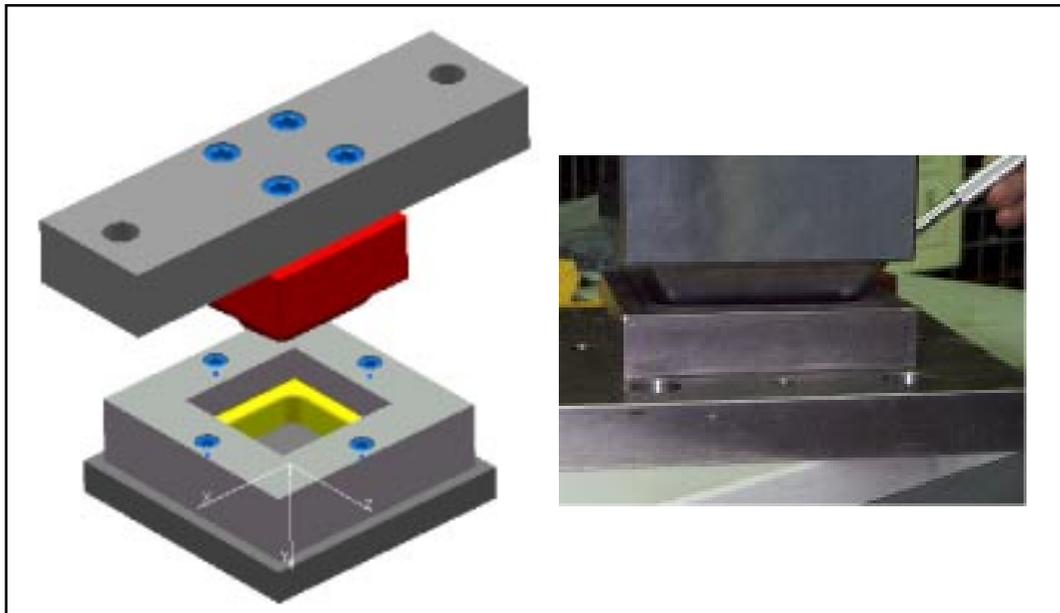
Small tool tryout CAD data and actual photo
